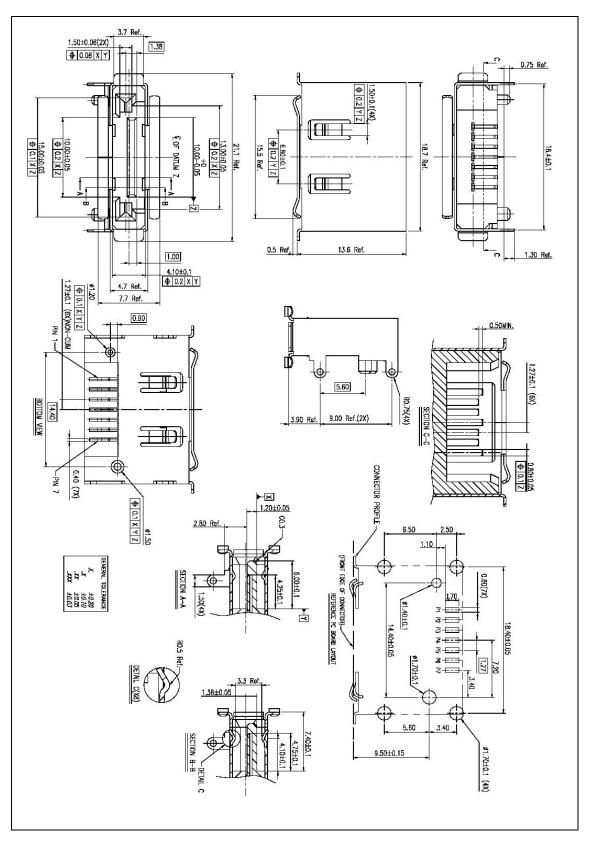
Mechanical dimensions of External SATA RA SMT plug – reversed pin out
